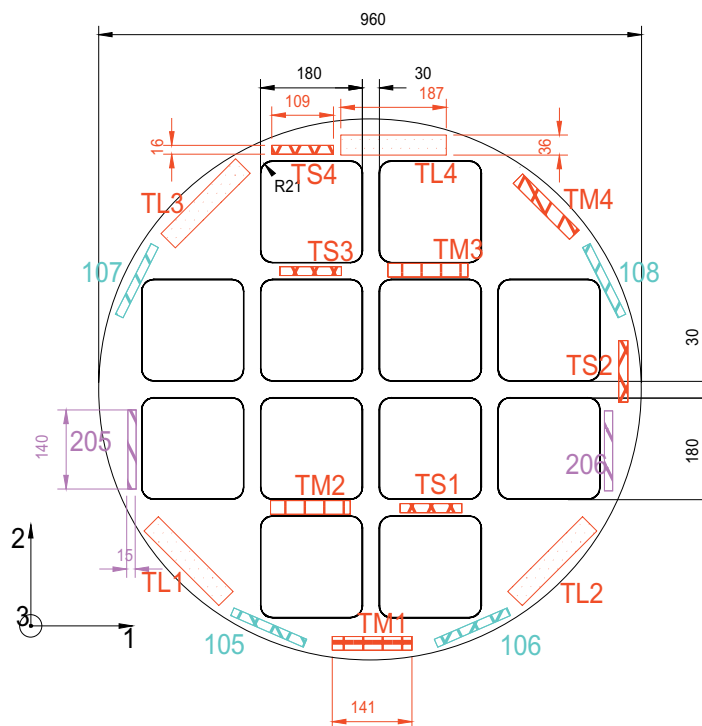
Schematic drawing of layer 2 with specimen numbering. T# indicates in-plane tensile specimens.
